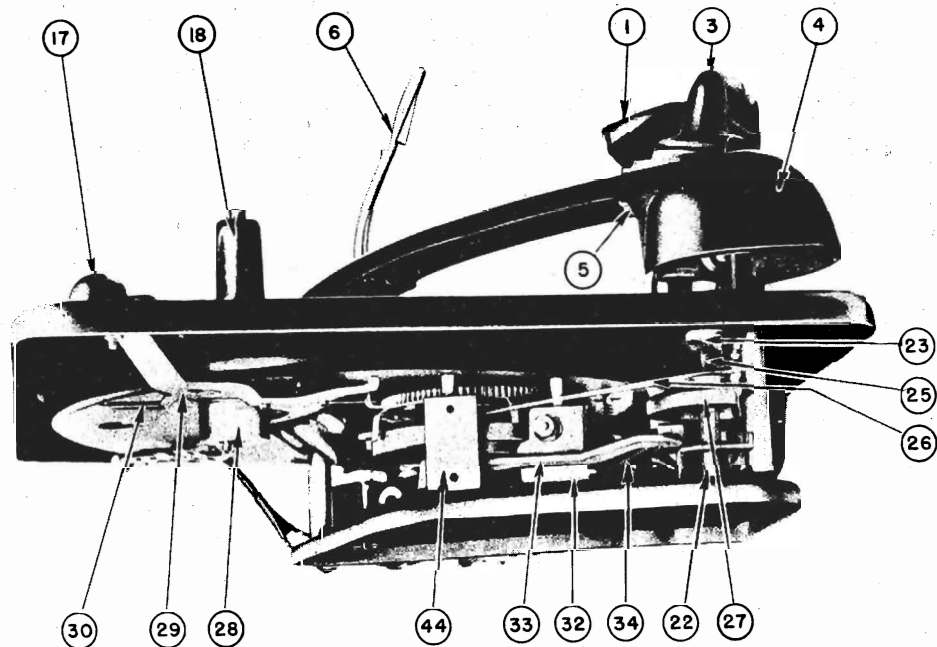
PARTS LOCATION -- RIGHT SIDE VIEW
